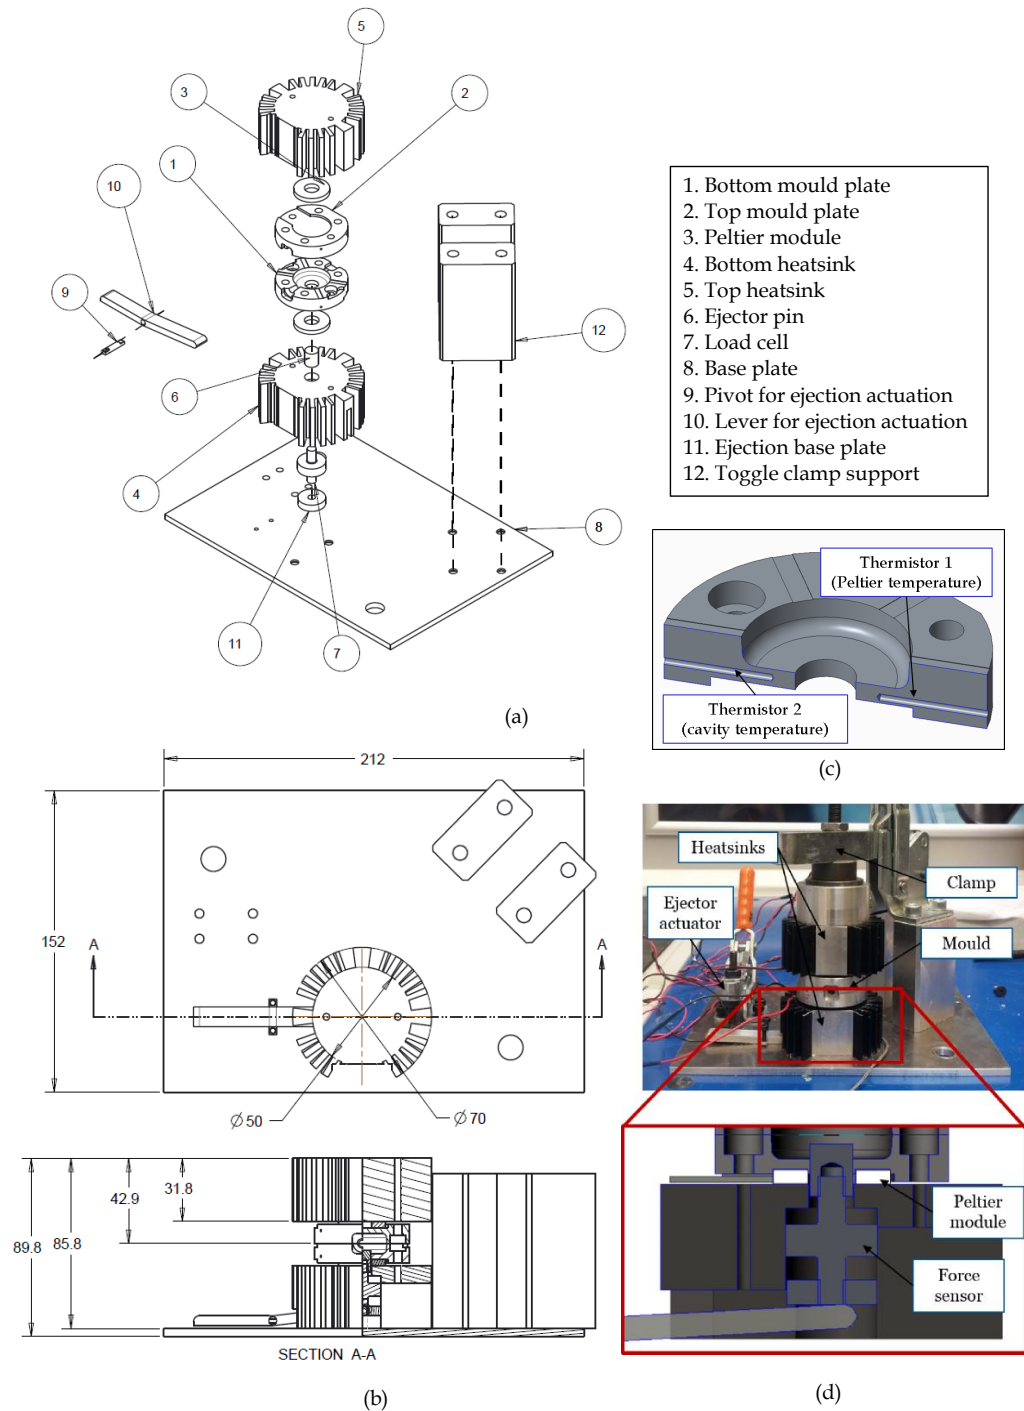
Setup for the adhesion tests. (a) Exploded view. (b) Drawing and main dimensions. (c) Picture of the setup.
